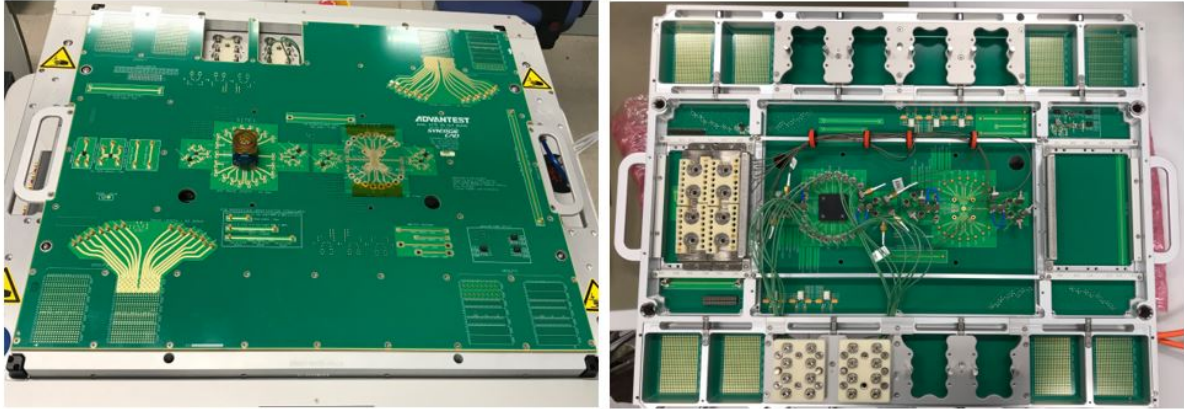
Top and bottom part of a DUT package testing test test fixture.
